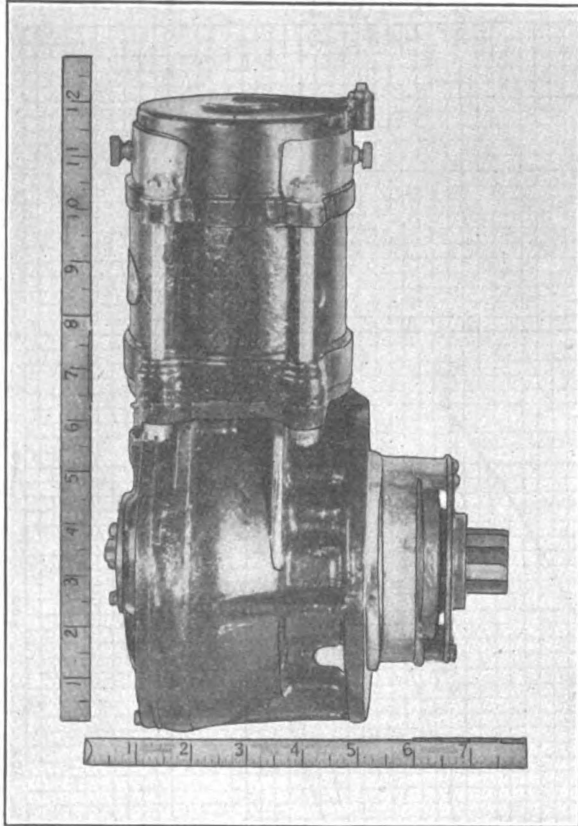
Bijur (rear end) starter, side view of assembly.
